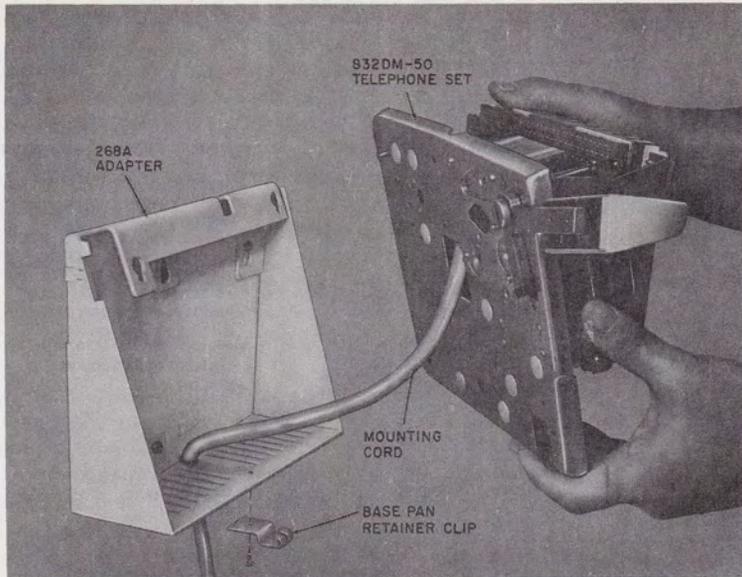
Installation of 832DM-50 Wall Telephone Set
